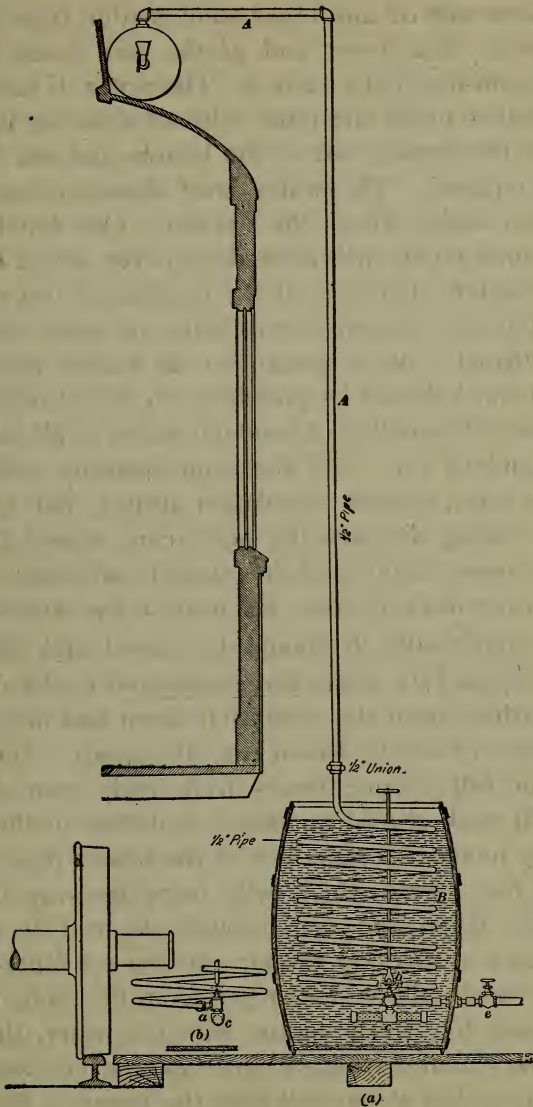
ARRANGEMENT ILLUSTRATING METHOD OF FILLING THE HEATER CIRCULATION SYSTEM.
